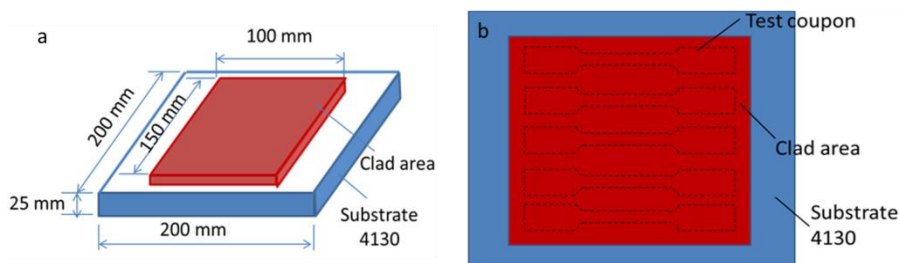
Schematic drawing of (a) the clad sample and (b) top view of sectioning the all-clad tensile test coupon
